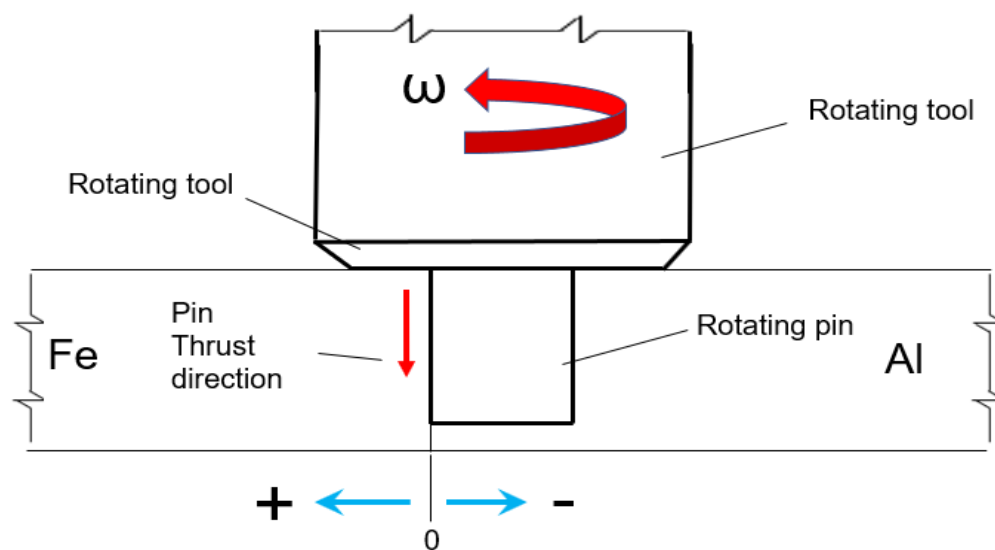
Schematic view of the cross-section perpendicular to the weld interface explaining the pin position and the coordinate.
